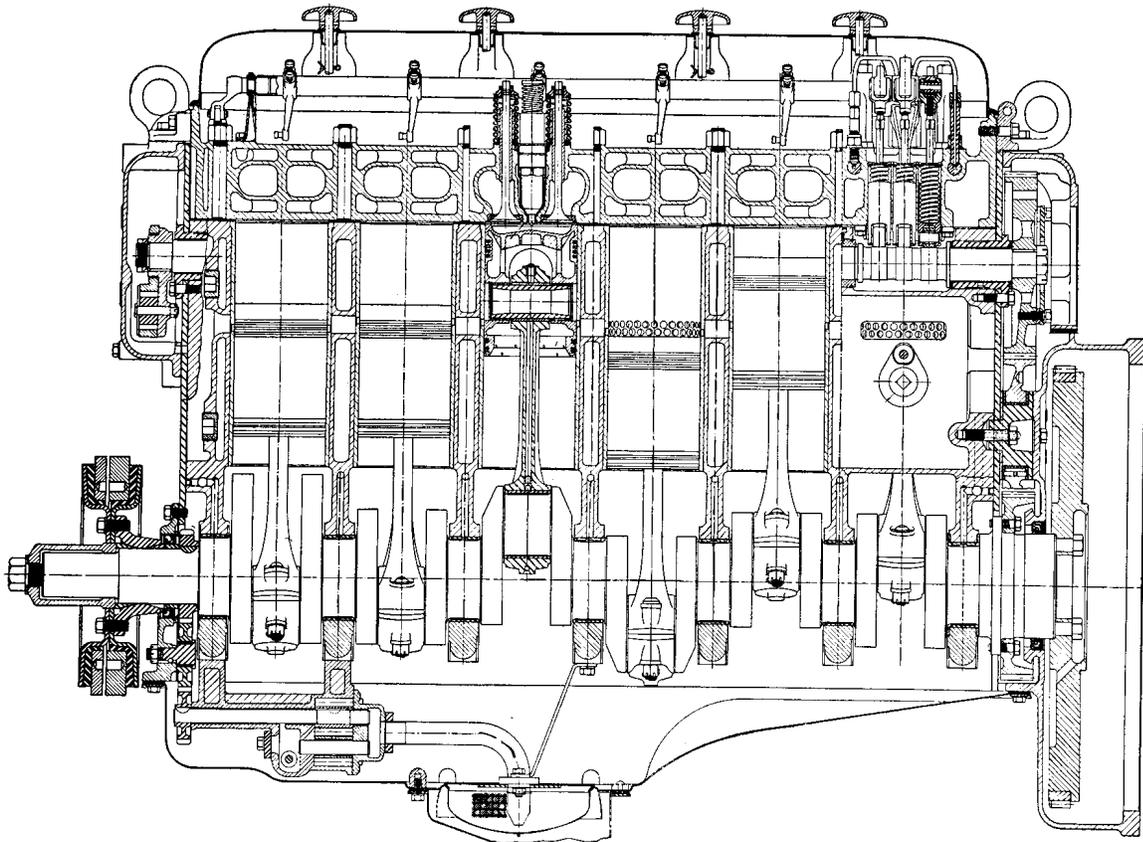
Longitudinal Cross Section GM 6-71 Engine.
